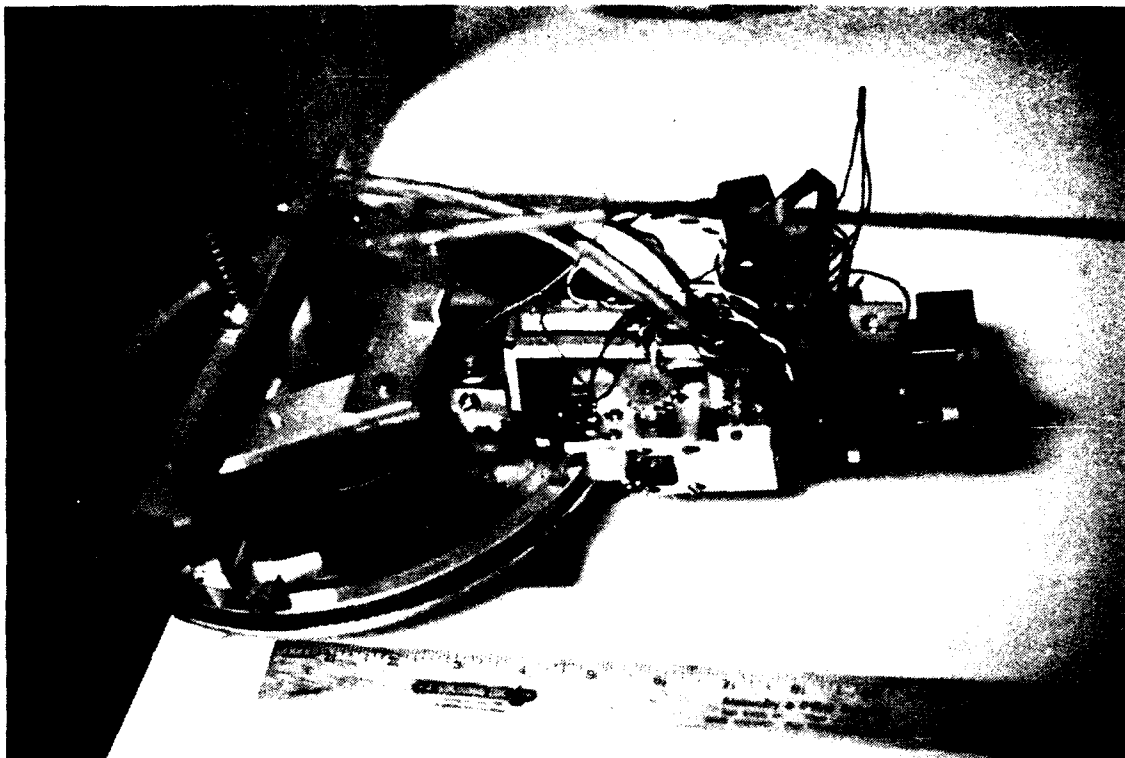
PROTOTYPE MOTORIZED JT8D BOSS WELD SCANNER ON
